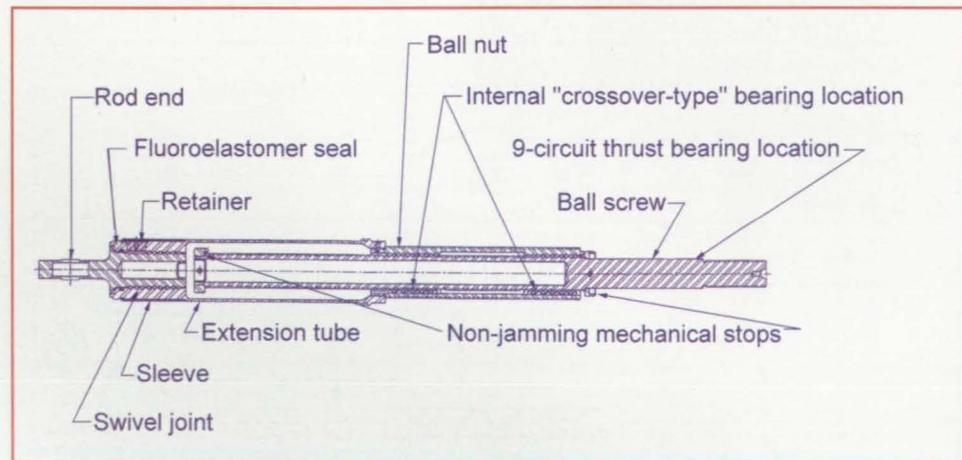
Cross-sectional view of the X-33 FCAS ball screw assembly.
